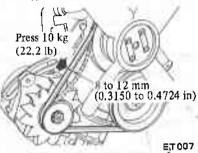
Fan belt tension 38. Install engine mount bracket (right hand), oil filter, oil pressure switch, oil level gauge and water drain plug. When installing an oil filter, fasten it on cylinder block by hand.
